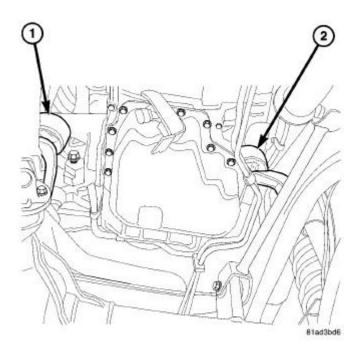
ENGINE MOUNTS Courtesy of CHRYSLER LLC
